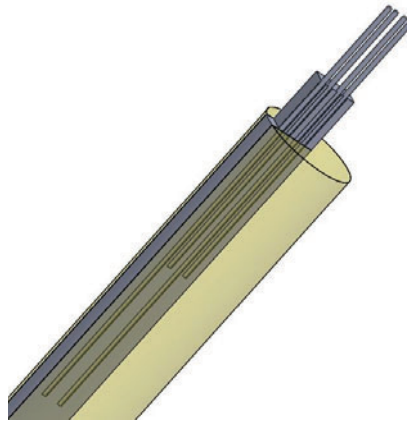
Transparent Post with Internal Thermocouple/Insert Assembly
